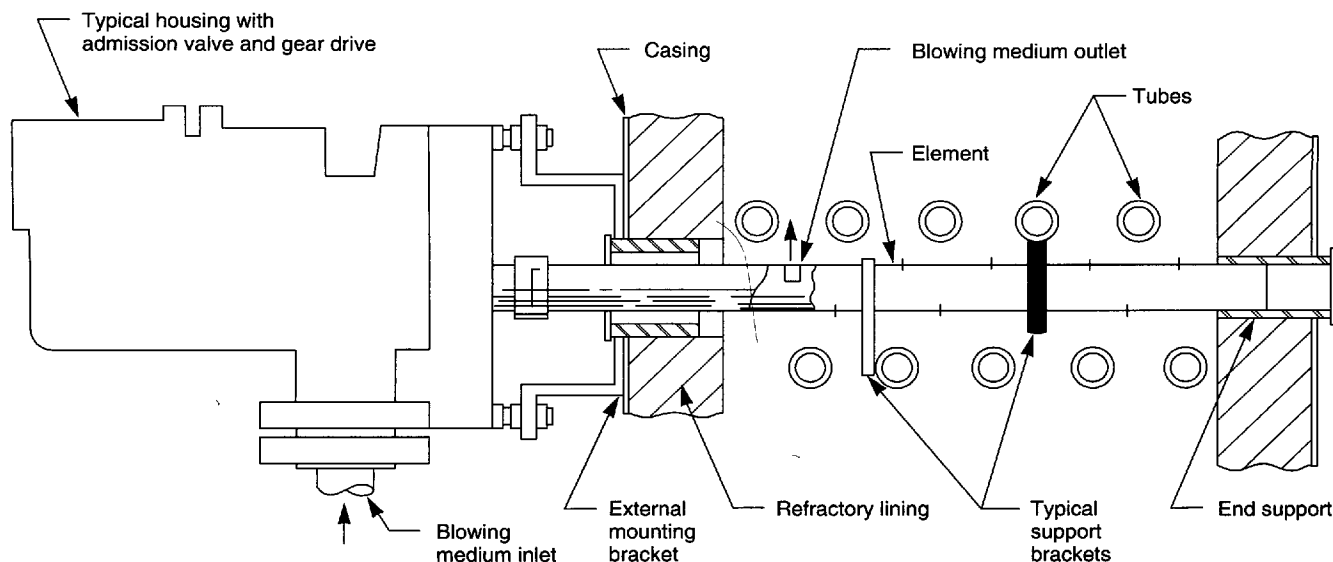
Typical Fixed-Position Rotary Mounting Arrangement
